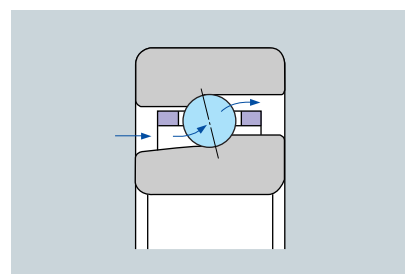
Ultra-high-speed angular contact ball bearings
